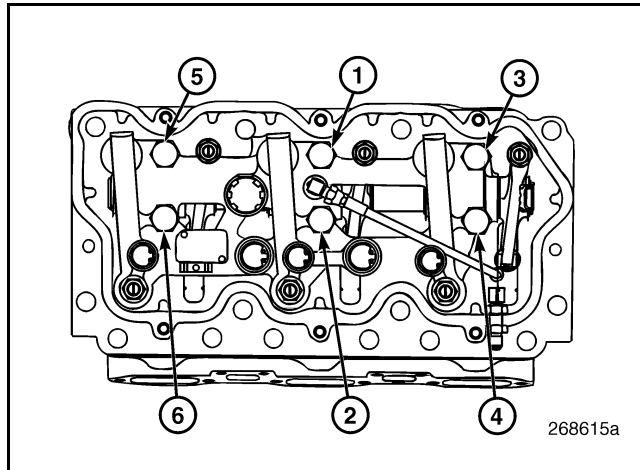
Engine Brake Assembly Mounting Bolt Tightening Sequence
